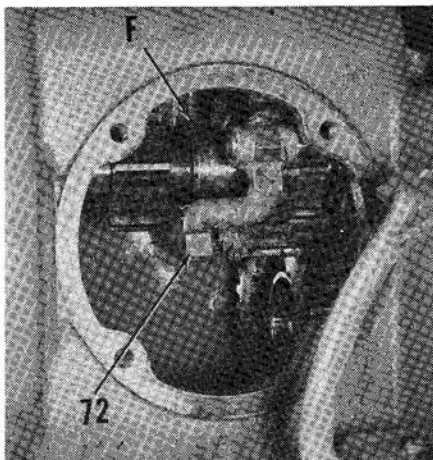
View of transmission with planetary gearbox assembly (Fig. 125) and main shift plate assembly (Fig. 127) removed. Upper shift fork (71—Fig. 127) must engage flange (F) and slot (S—Fig. 127) must fit connector (72) when reinstalling shift plate assembly.
